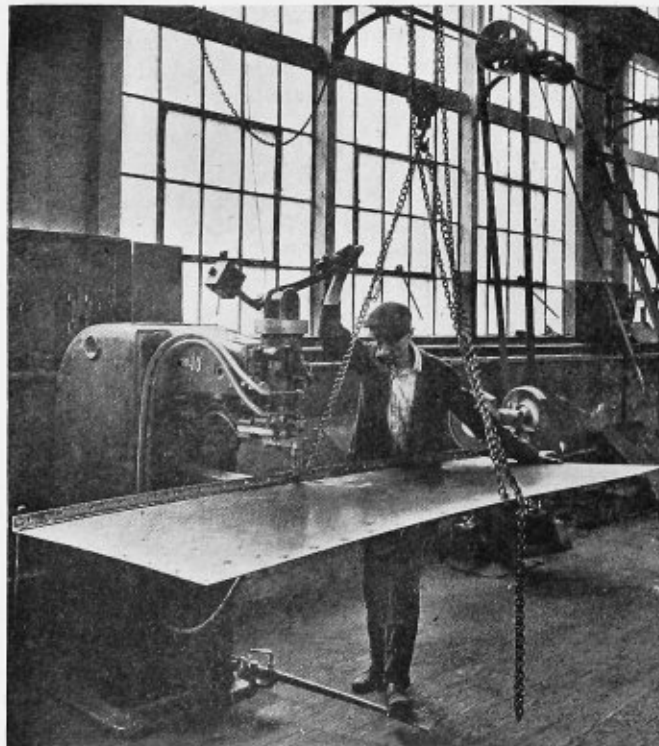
Thomson 20-Kilowatt Spot Welder Used in Fabricating Boiler Casings
